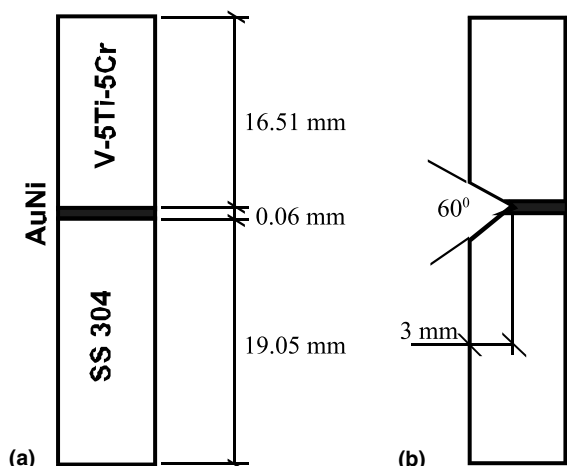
The geometries of tensile specimens from the V-5Ti-5Cr/Au-Ni/SS 304 brazed joint: (a) unnotched specimen; (b) notched specimen.
